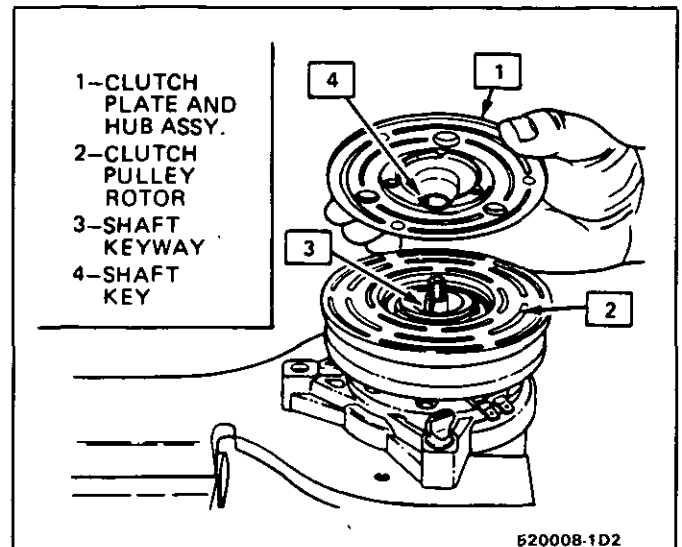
Shaft Key, Clutch Plate/Hub Installation
